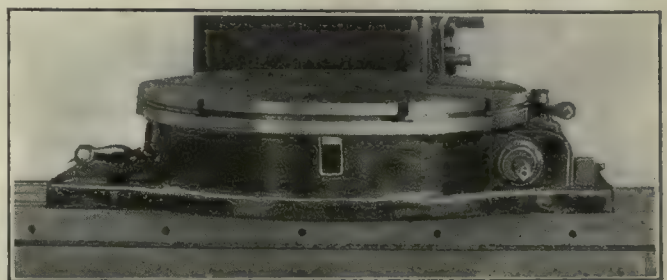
TOLEDO ROTARY MILLING-MACHINE TABLE FRONT VIEW. FIG. 2—SIDE VIEW OF TABLE
